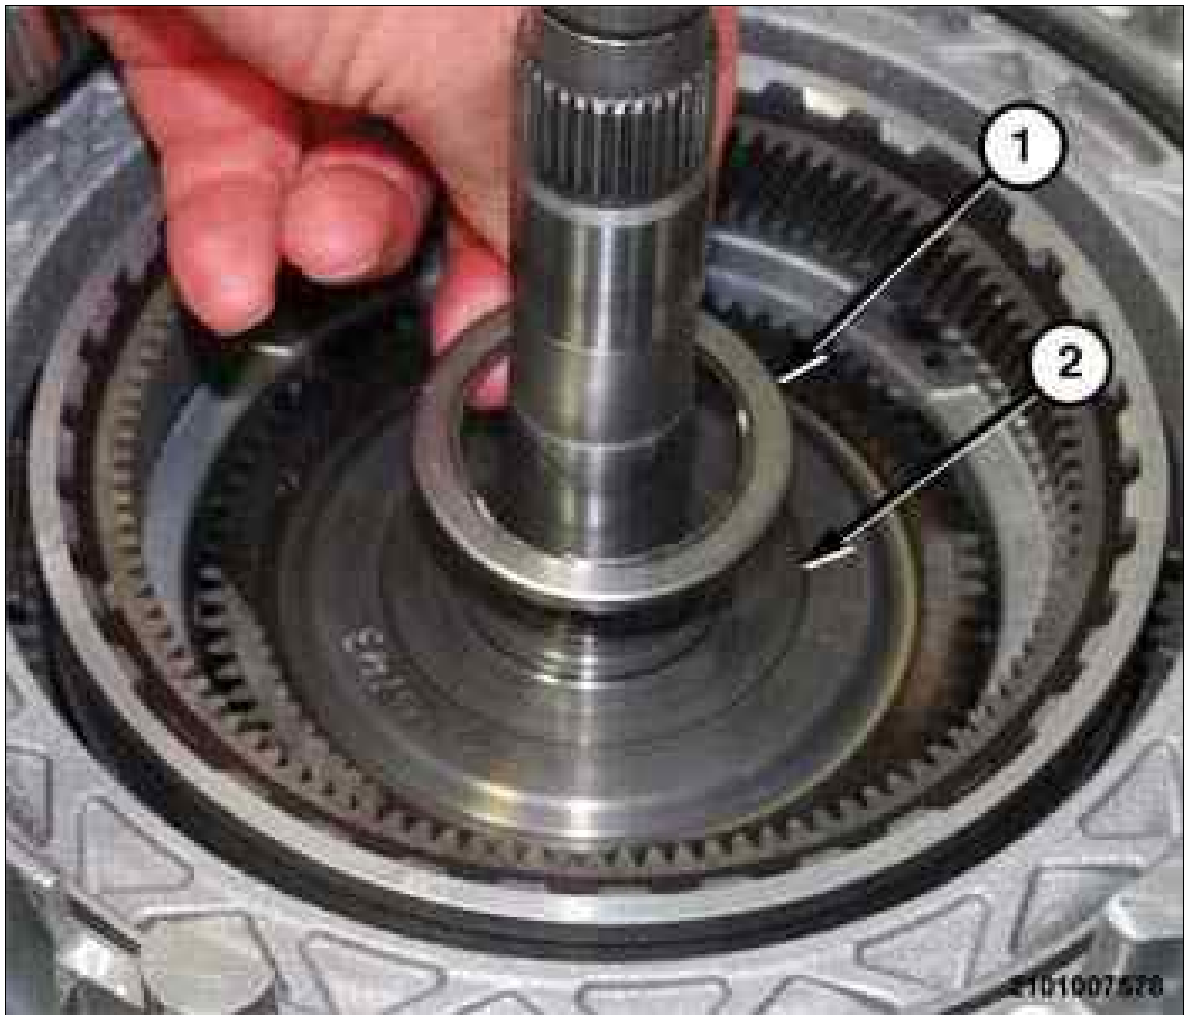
Annulus Gear 1 Planetary Hub, Carrier Gear 1 And 2
